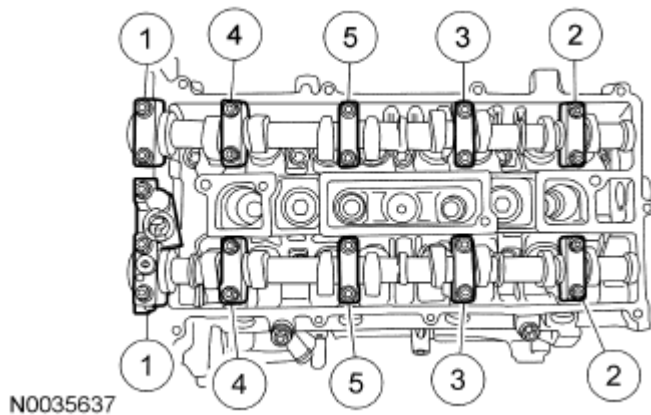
Identifying Camshaft Bearing Cap Bolts Loosening Sequence
